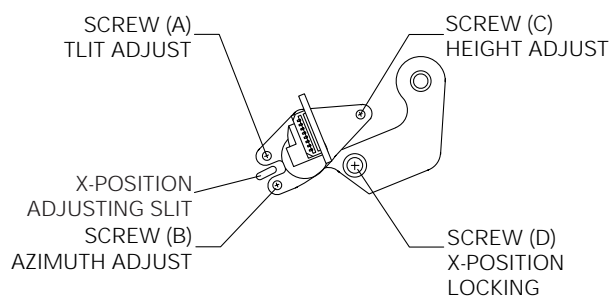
Location of ACE Head Adjustment Screw
